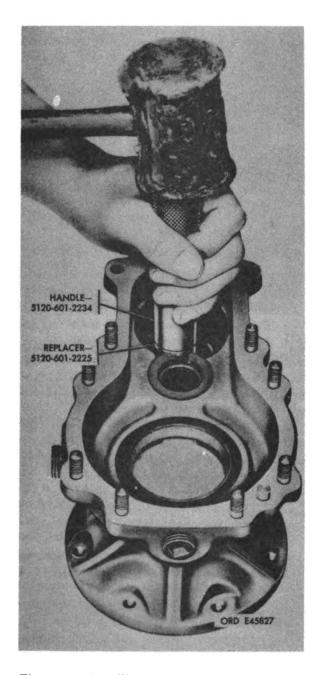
Installing encased seal in drop gear axle housing using replacer-5120-601-2225 and handle—5120-601-2234.
